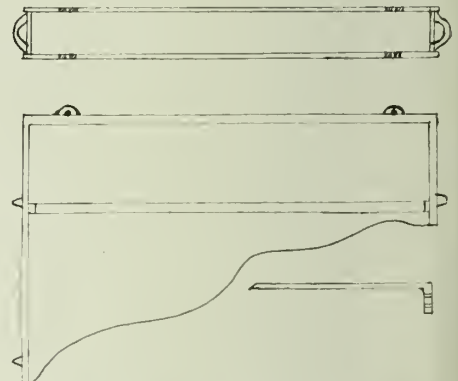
LOOSE BARREL DRAGS FORMING CHECK PARTS.
